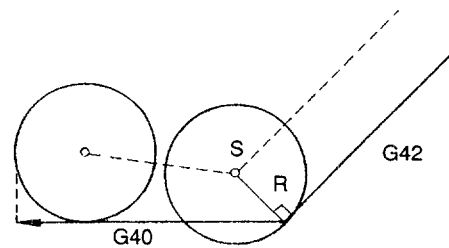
Canceling the Offset Mode at Inside Corner (Straight-line to Straight-line)
